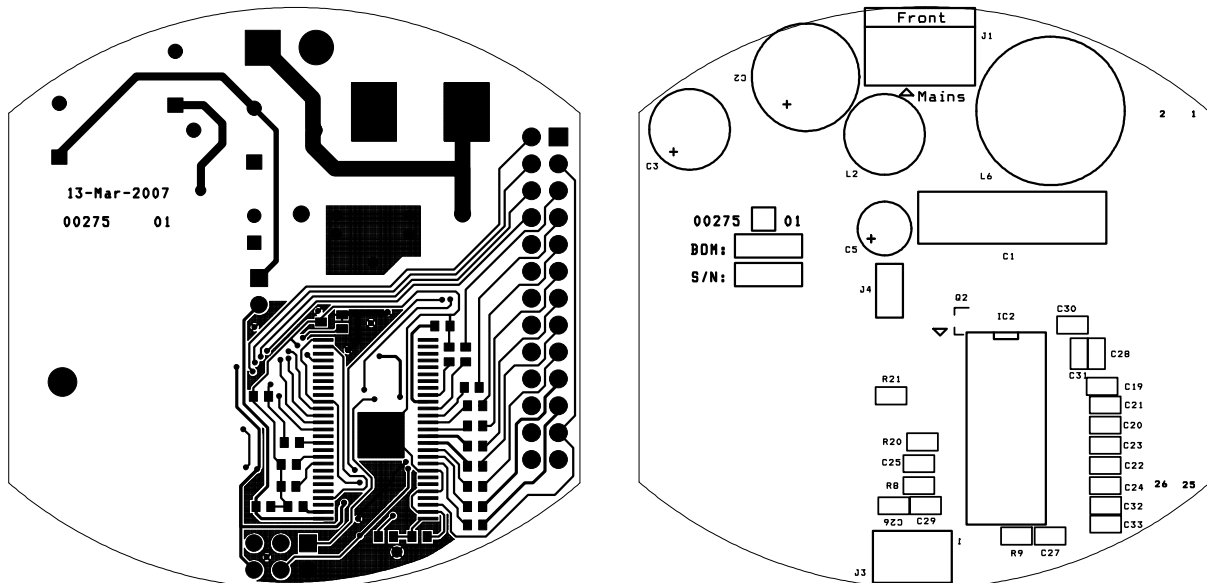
Parts Placement and PCB Layout, Bottom Side
